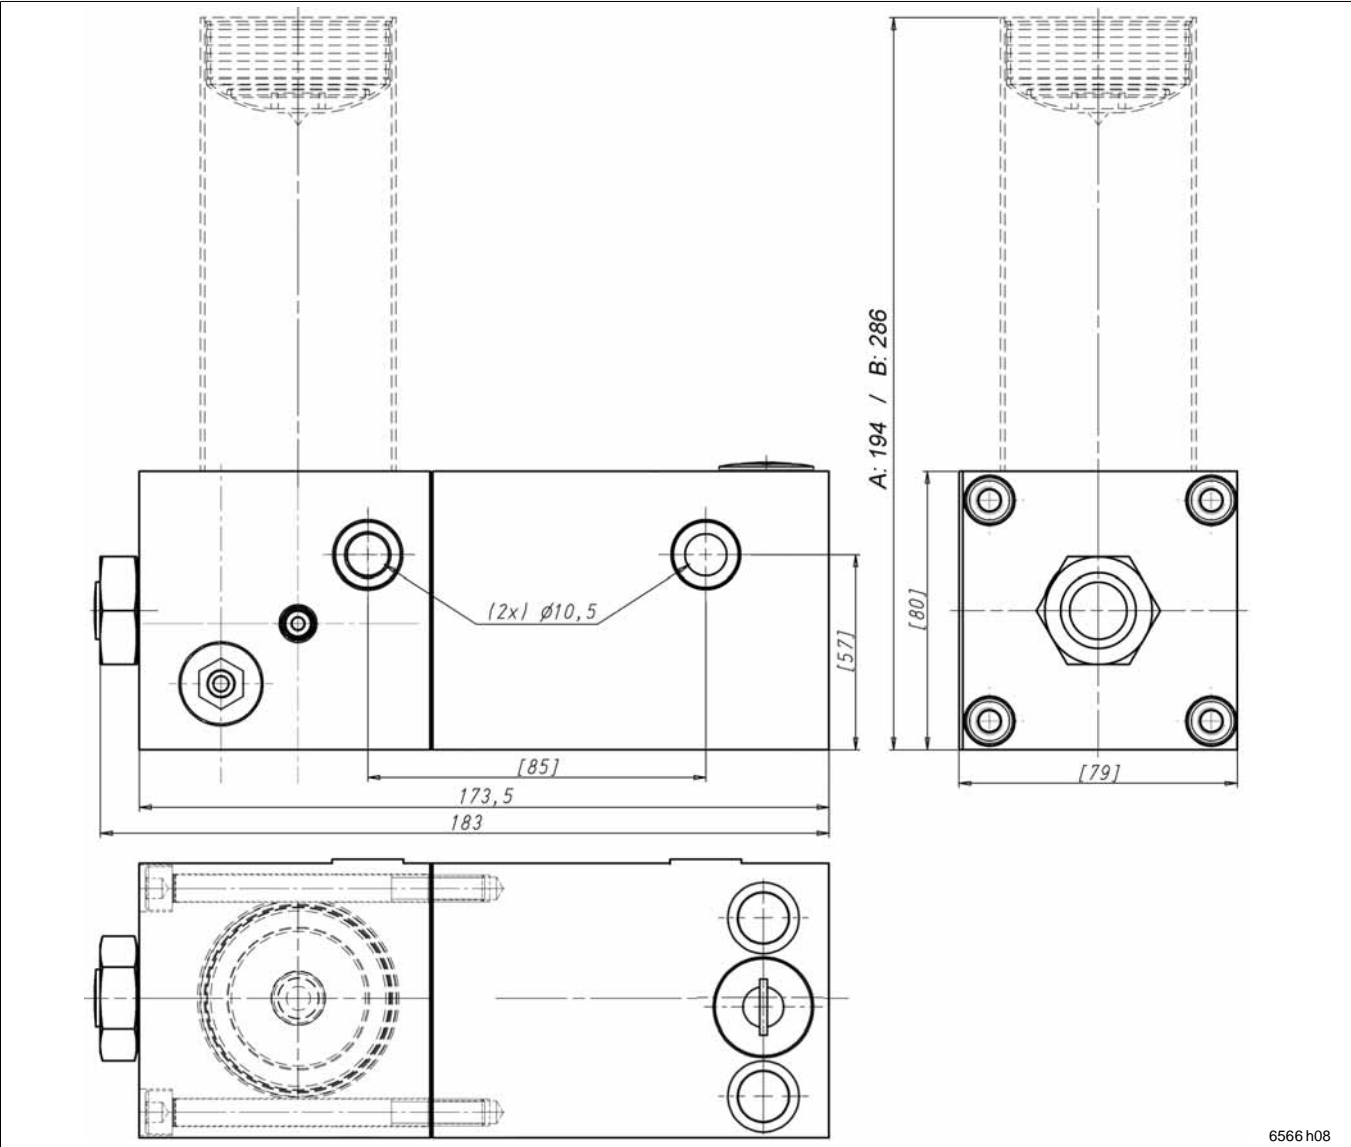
Dimensions of the Hydraulic Lubrication Pump HTL 201 with cartridge
